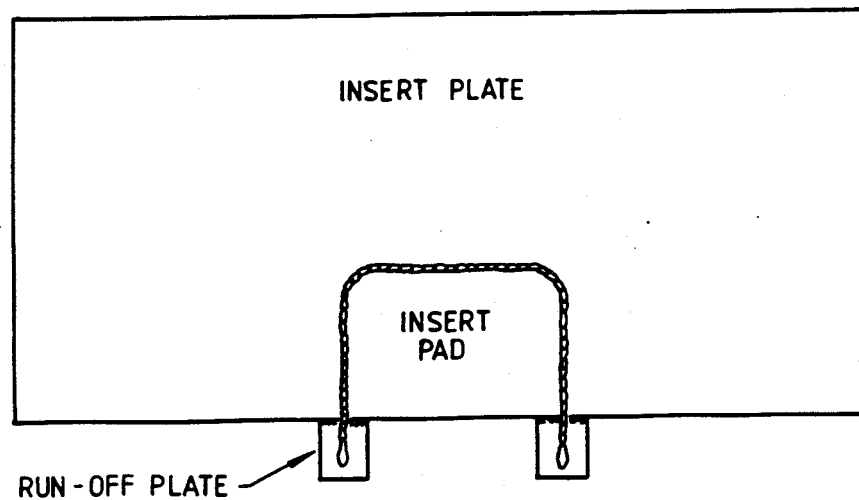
INSERT PADS AT EDGE OF INSERT PLATE
